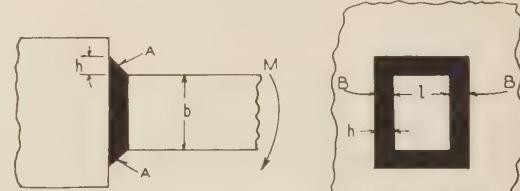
FILLET-WELDED BAR SUBJECTED TO BENDING
